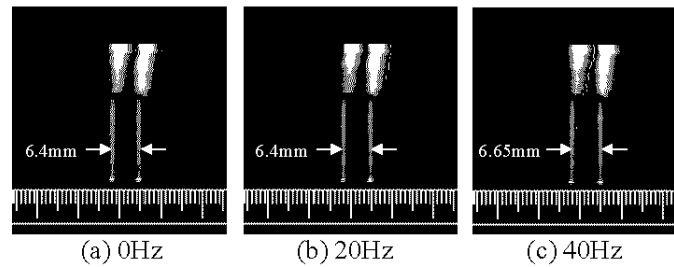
Deflection of welding wire in rotating arc welding ($D=6\text{mm}$)
